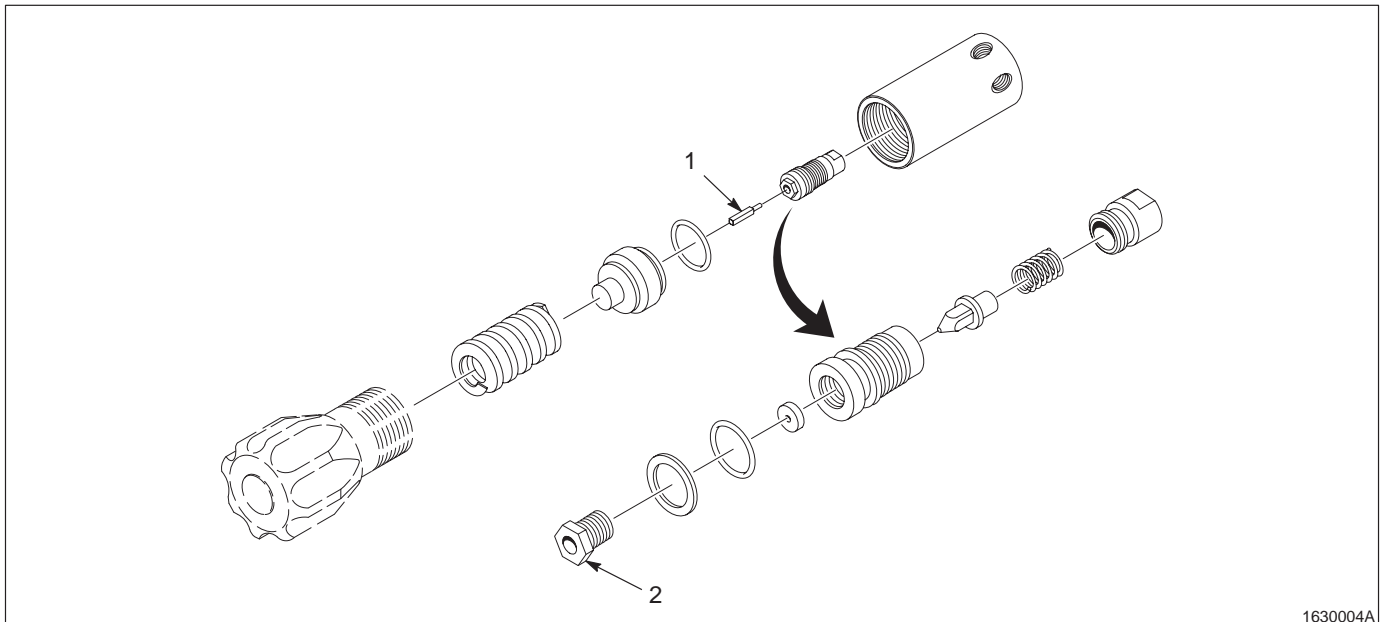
Additional Parts Required for the Hard Seat Regulator
